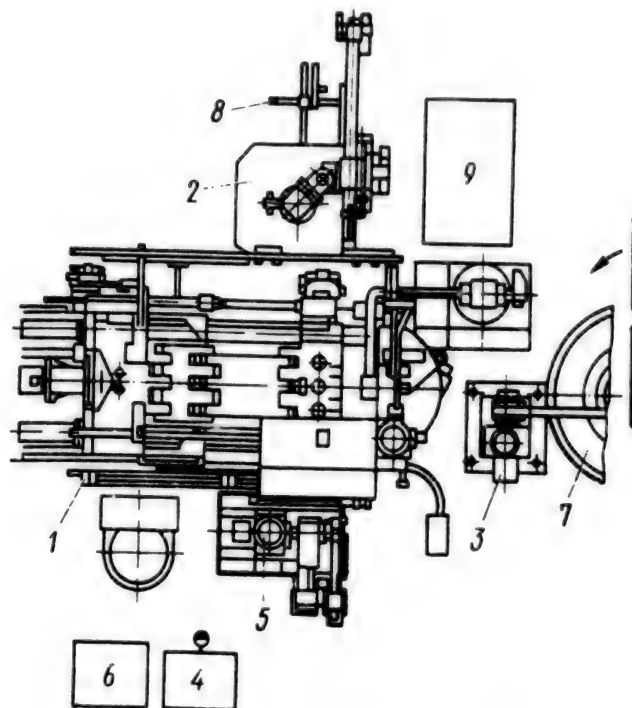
Diagram of Automated Pressure Die Casting Complex With Vertical Cold Molding Chamber:
